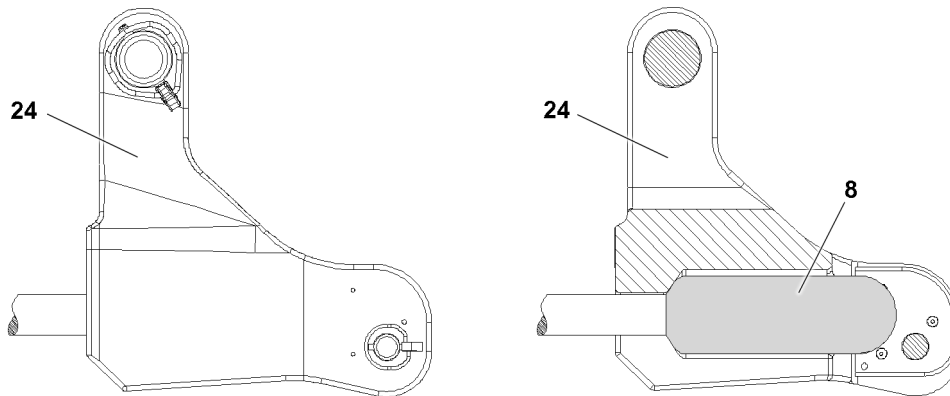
L-shaped rope end connection 24 with locking clamp 8 or locking cast sleeve 8
